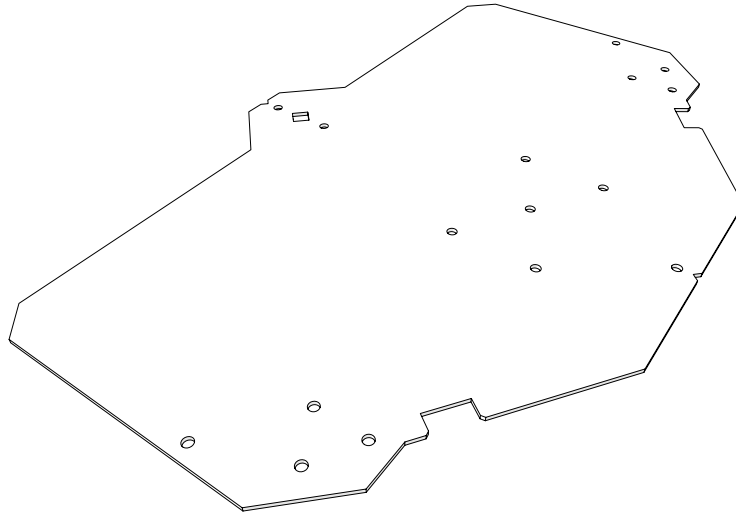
Drilling template for finished floor (GAB-E-0113963)
